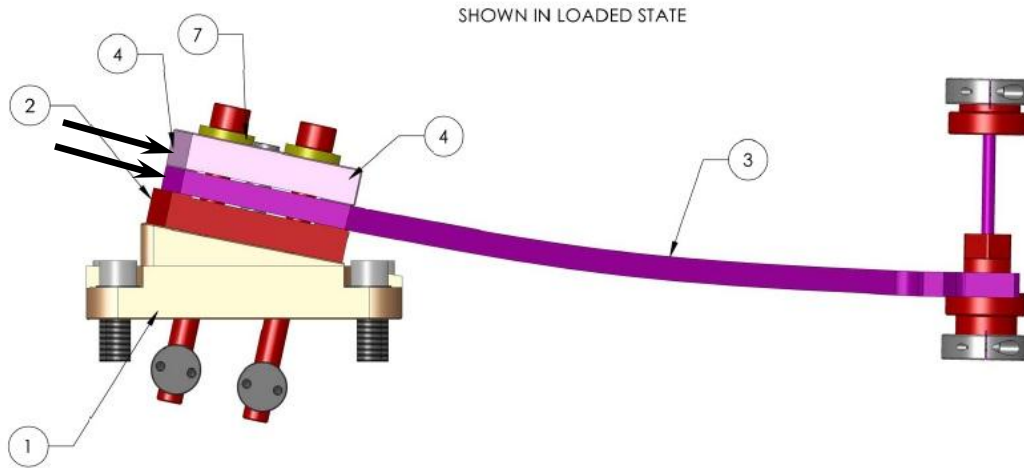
D0902485 Stage 1-2 Blade Assembly Drawing in the Loaded State
